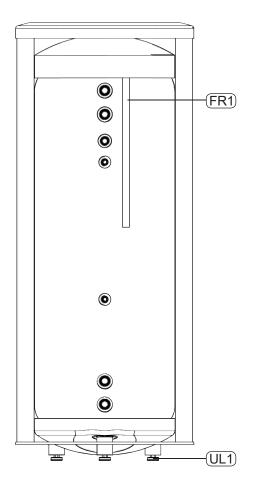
Section of the BA-ST 9022-9050-FE storage tanks.
